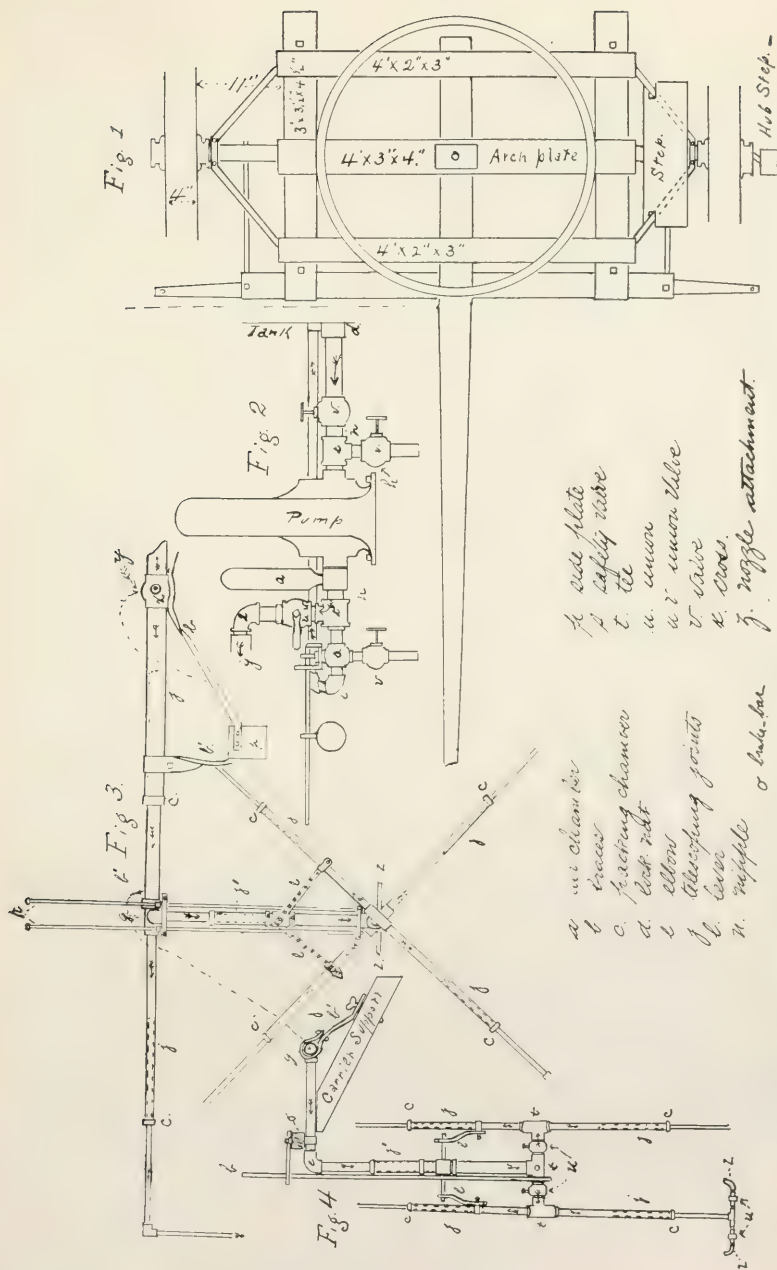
PLATE XVII.—DETAIL PLAN OF FRONT TRUCK, PUMP, CARRIER AND ARMS OF ASPARAGUS SPRAYER.
